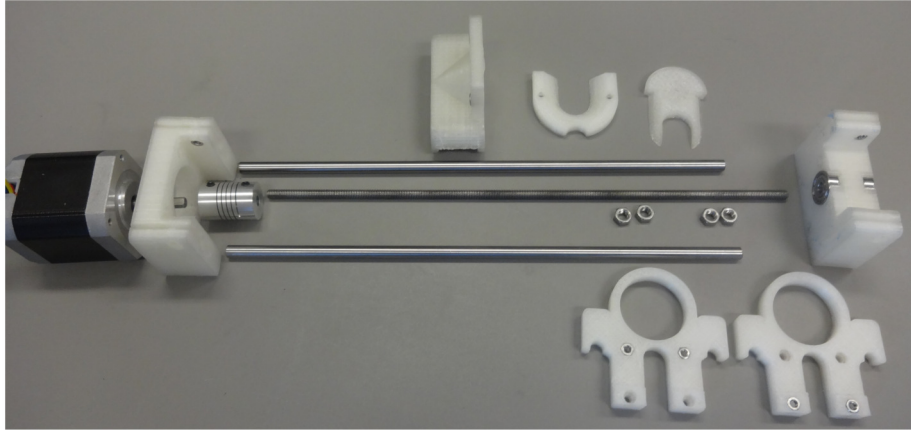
Exploded view of Open-Source Syringe Pump.
